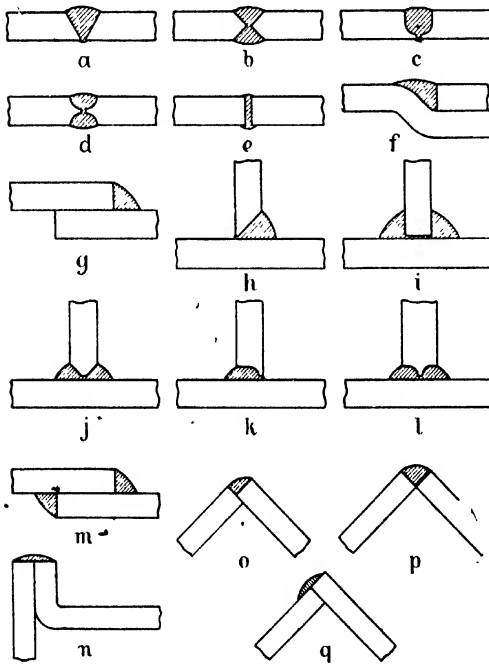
TYPES OF ARC-WELDED JOINTS
